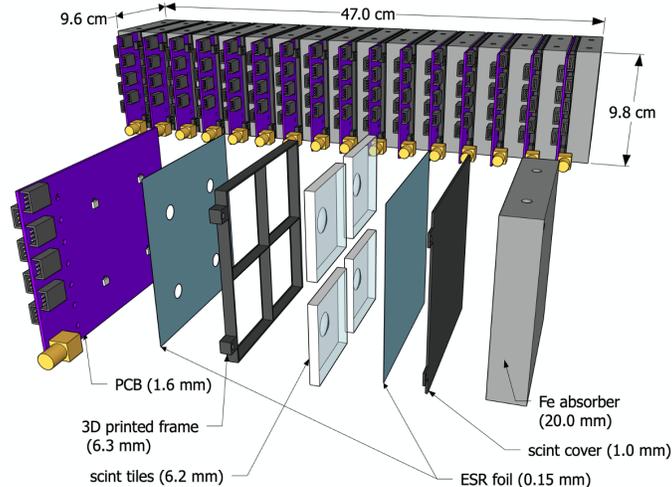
The SketchUp model of the HCAL insert prototype. Ref. [4]
